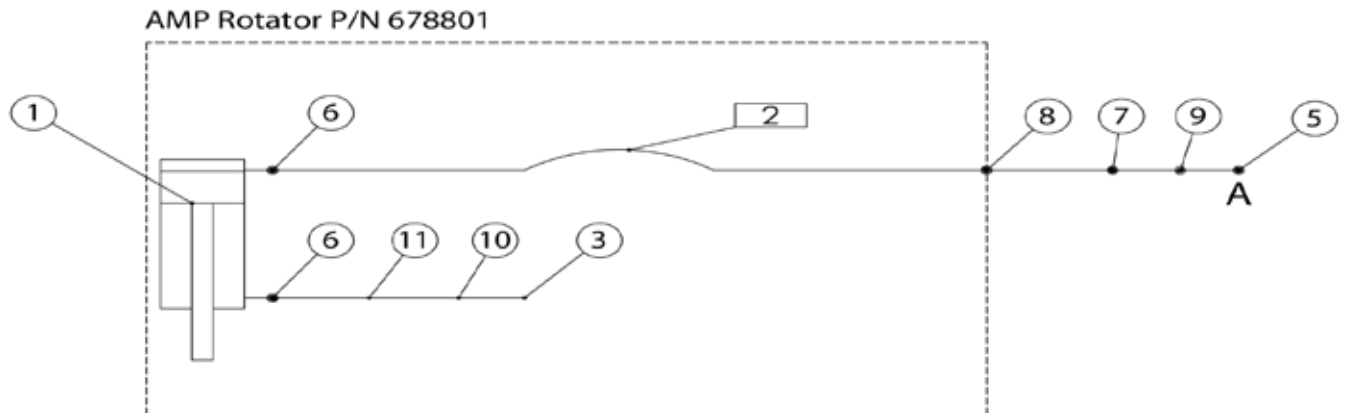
Drawing 678801-H Hydraulic Assembly Single Rotator
